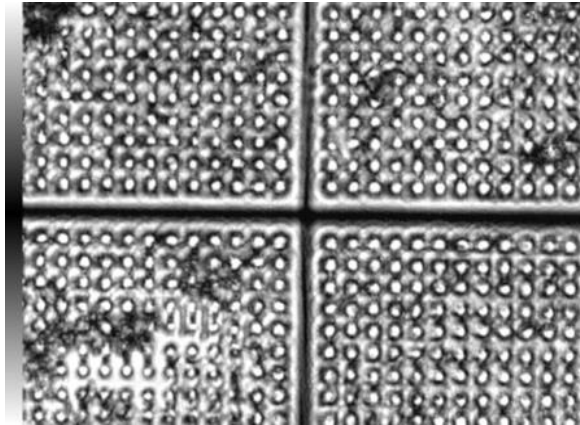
C-SAM imaging of interposers after dicing showing no cracks in the singulated coupons
